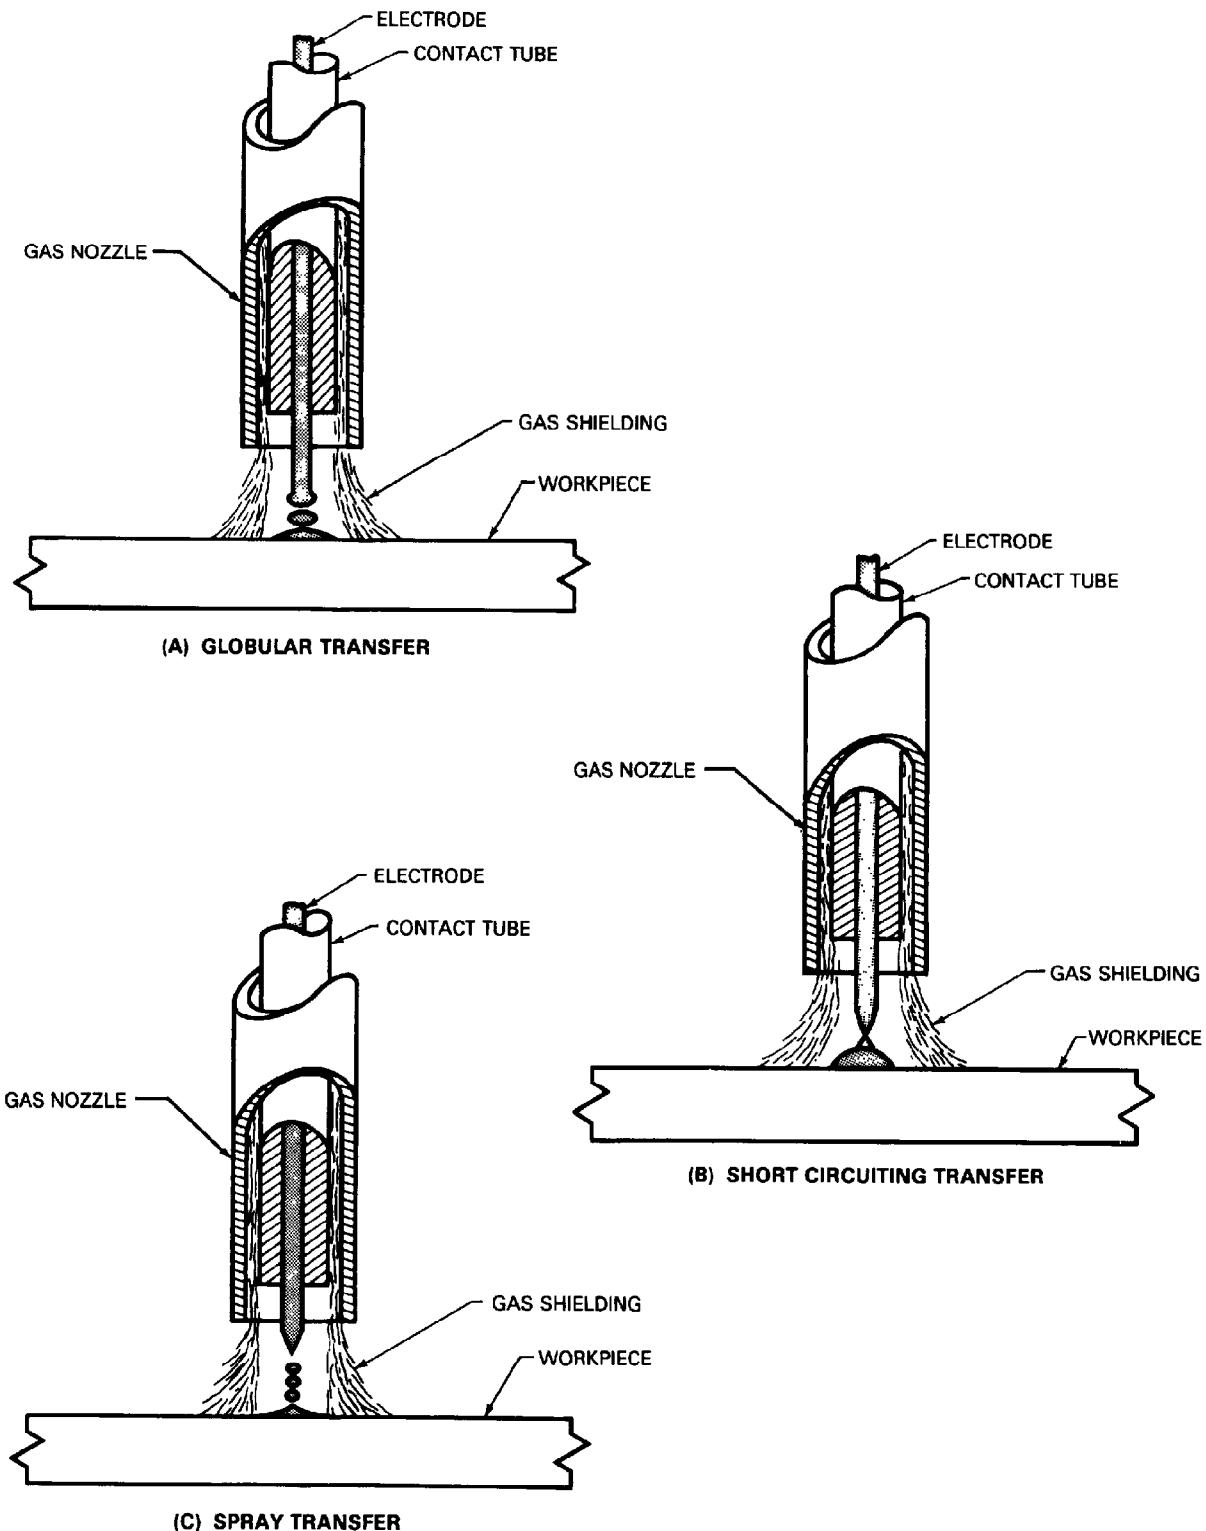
Metal Transfer in Gas Metal Arc Welding
